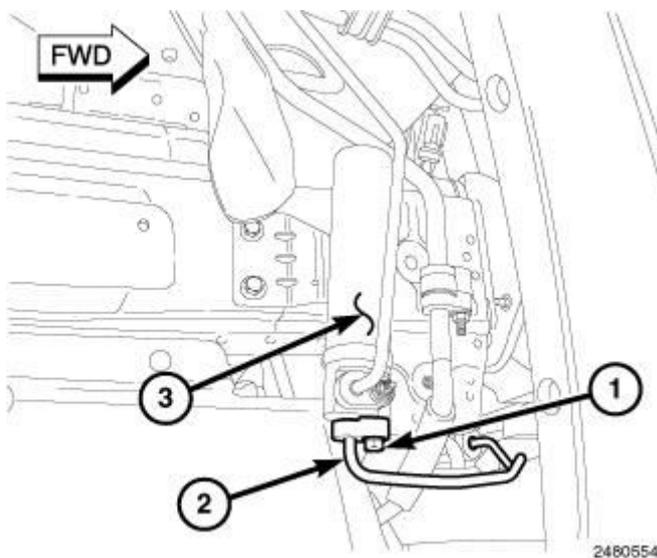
Identifying A/C Receiver/Drier & Retaining Bolt
